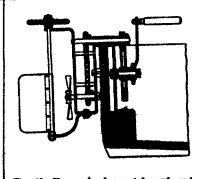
View of a propeller provided with a dam and bottom seal, as shown in the drawing.
